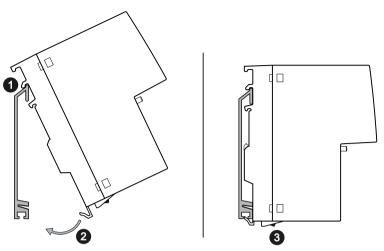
S7-300 mounting rail installation with the securing bar in the wall mounting position.
